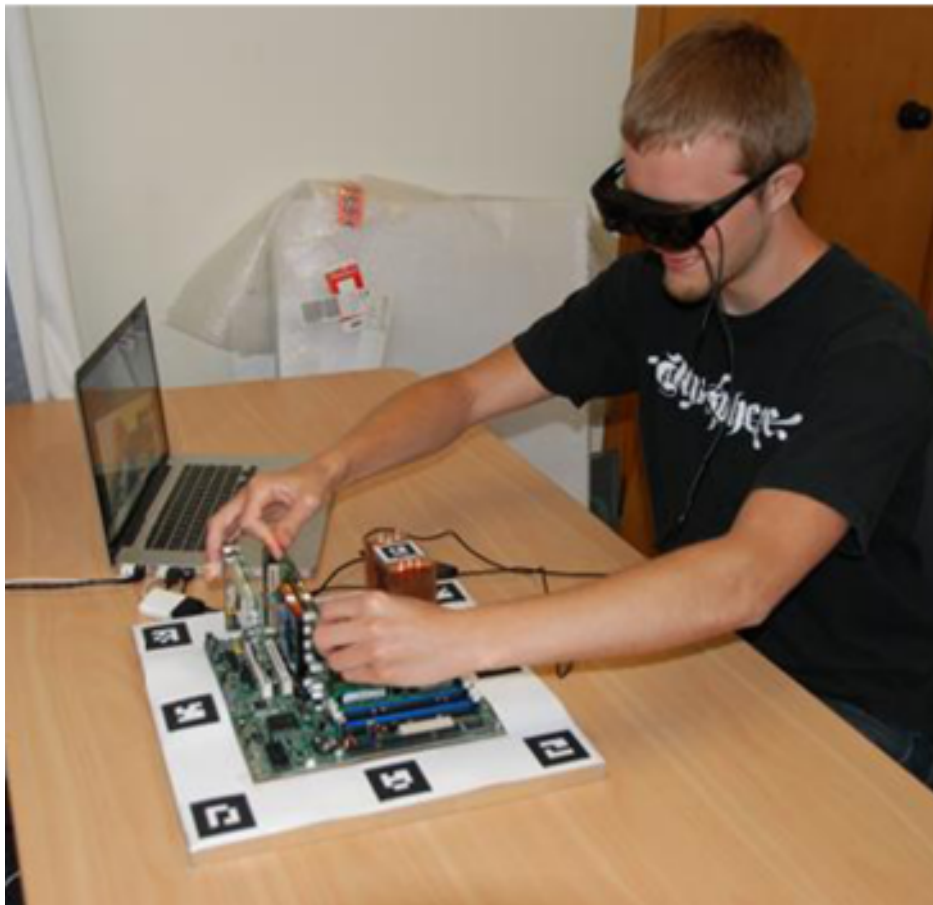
Using of ITS for learning assembling of motherboard [302]
